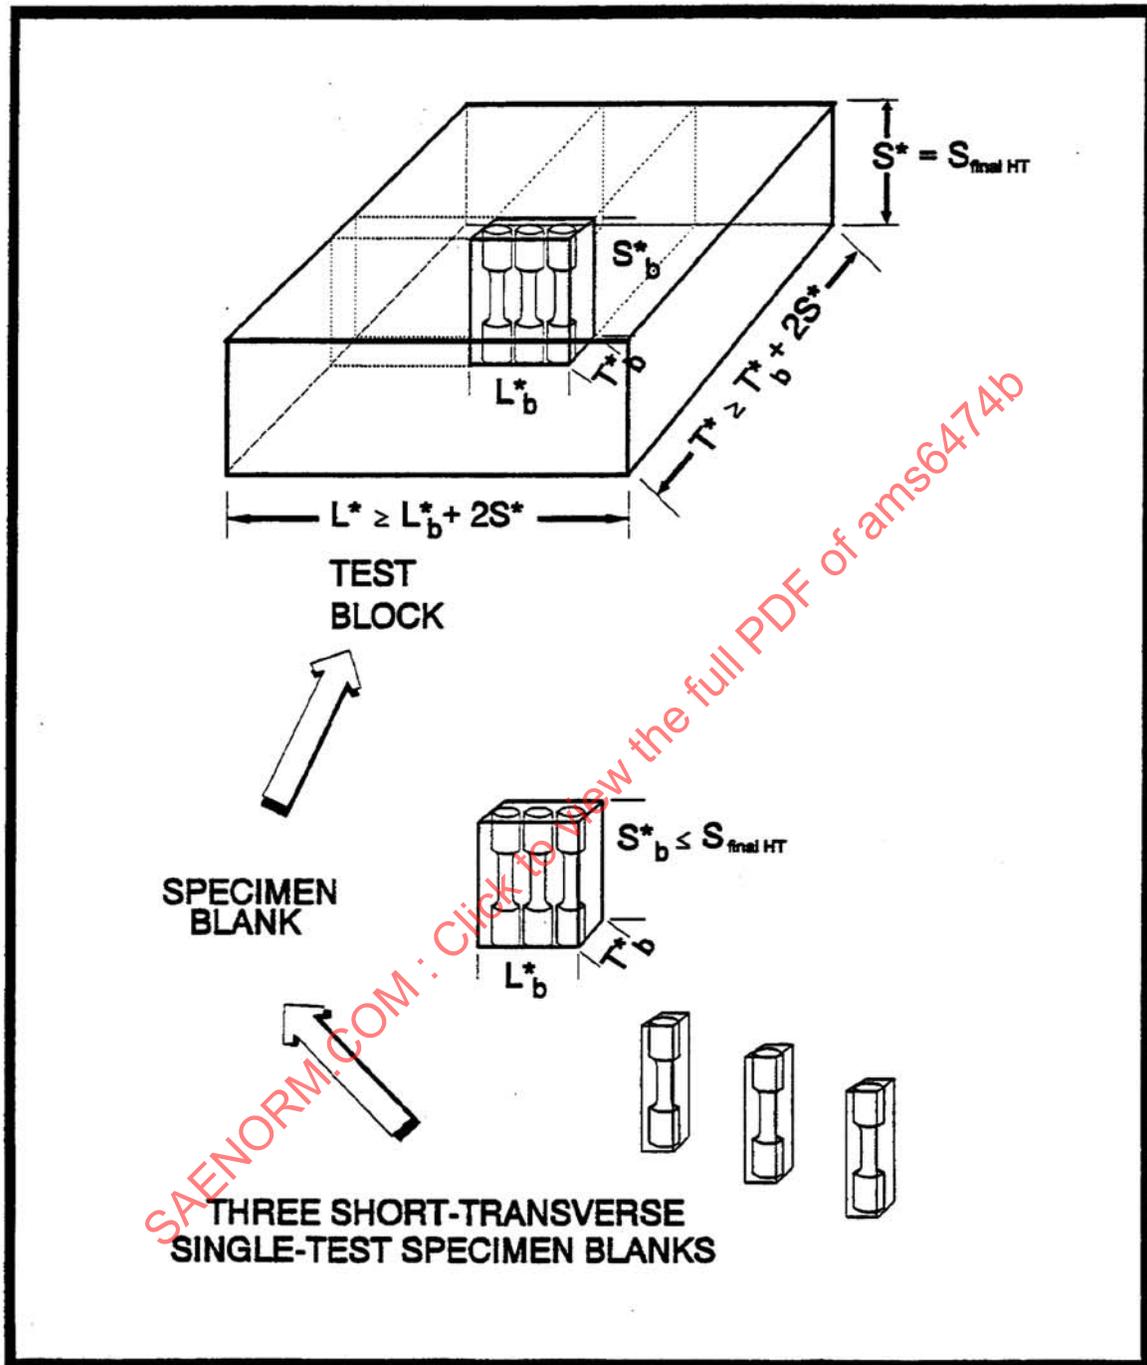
SHORT-TRANSVERSE SPECIMEN BLANK DESIGN AND TEST BLOCK DESIGN
